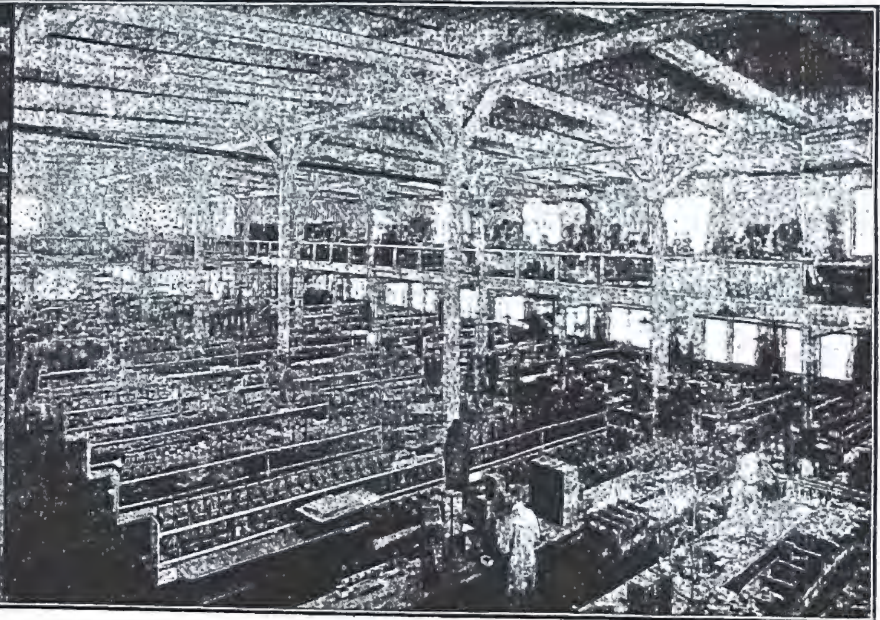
GENERAL VIEW OF THE MANUFACTURE AND ASSEMBLY OF RC, DA, AND RA SETS
